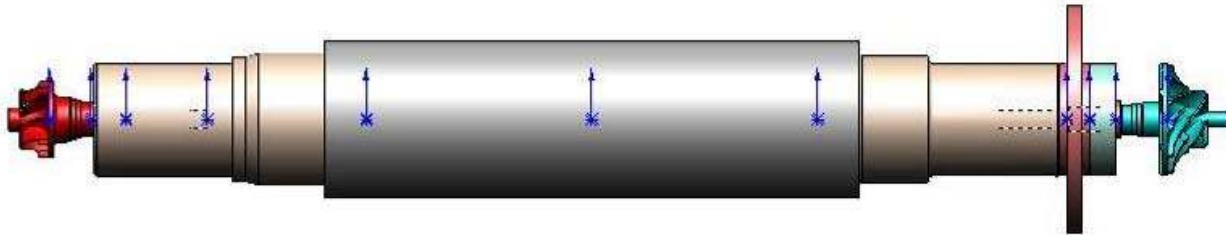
Engineering schematic of the Sm-Co Permanent Magnet rotor with gas foil journal and thrust bearings. The thrust bearing is on the right next to the compressor wheel. The moment of inertia is 7.53 lbs/in² in the current design. The “red” disk is the thrust bearing surface, but was increased in size to allow for greater thrust load capability and for the inclusion of magnetic thrust bearings.
